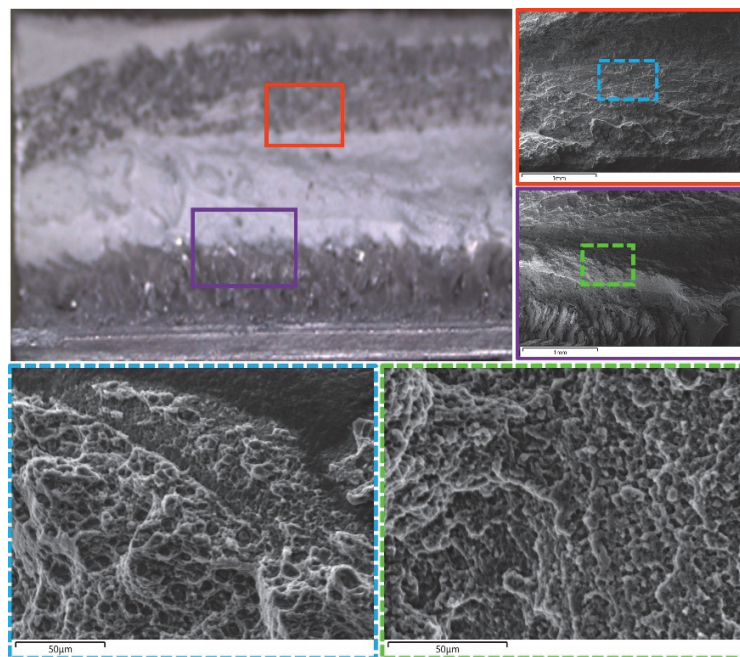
Fracture surface analysis of specimen FSW_12
